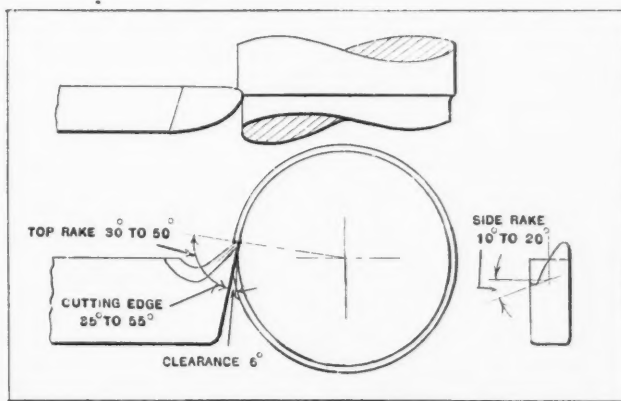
One Type of Lathe Tool that May be Used for Machining Aluminum
